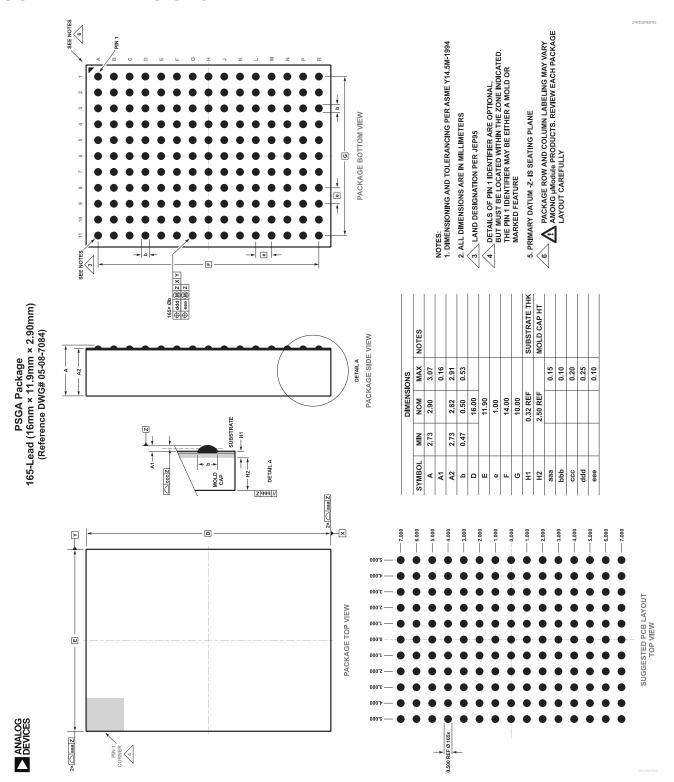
165-Pin, 16mm × 11.9mm × 2.9mm, Pre-Soldered Grid Array (PSGA)
